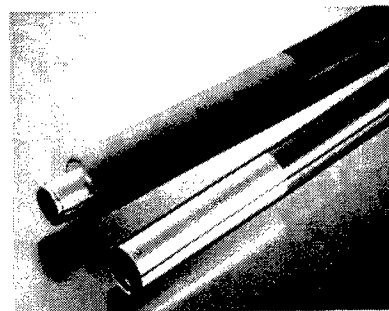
Recycling of used dram for copy machine by removing damaged surface film.
